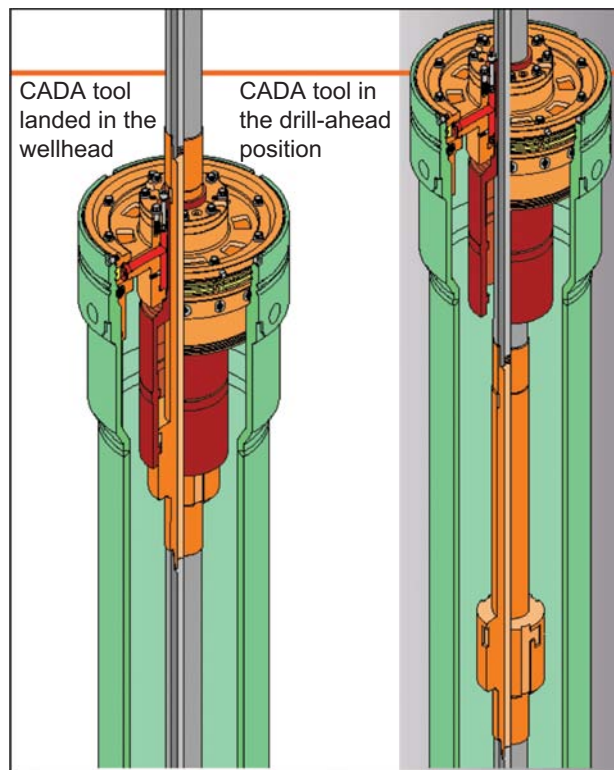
Cam-actuated drill-ahead (CADA) tool (courtesy of Dril-Quip).
